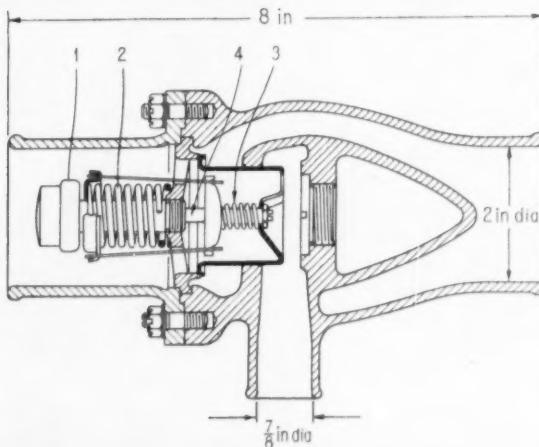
Thermostat with pressure-insensitive element. Housing designed to reduce pressure losses
